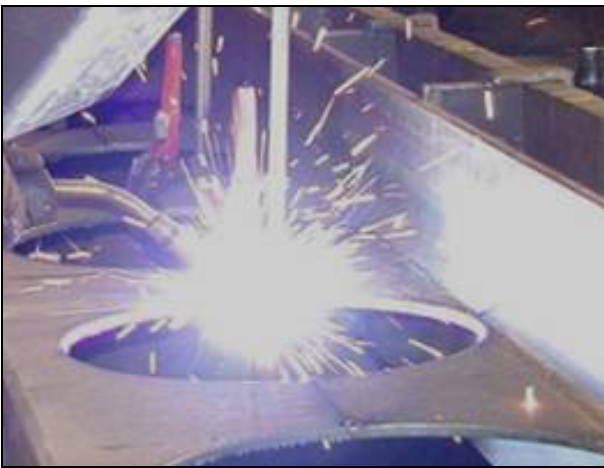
Fabrication process: welding the separated tee-sections together
